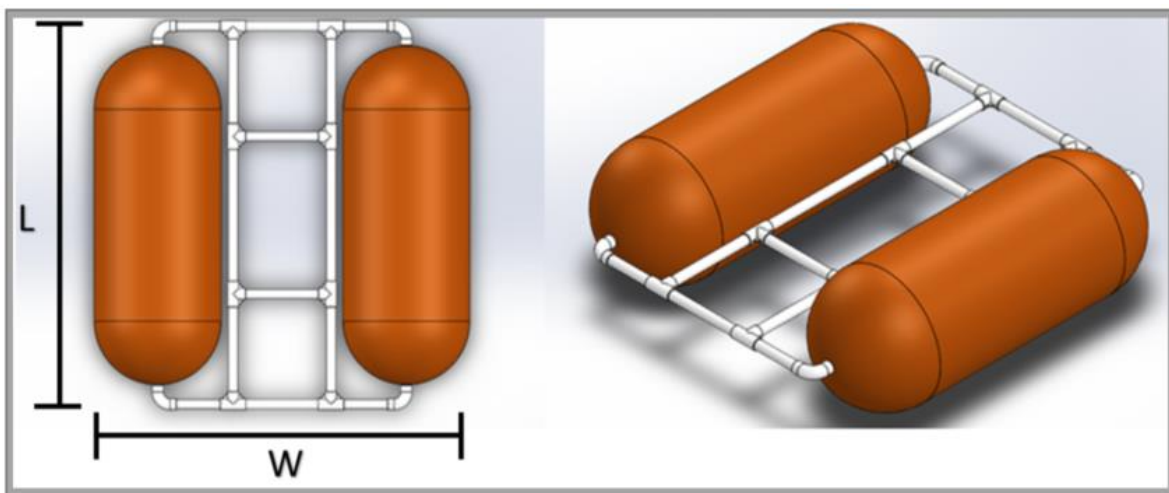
Top & Isometric View of B1848BO Frame Assembly
